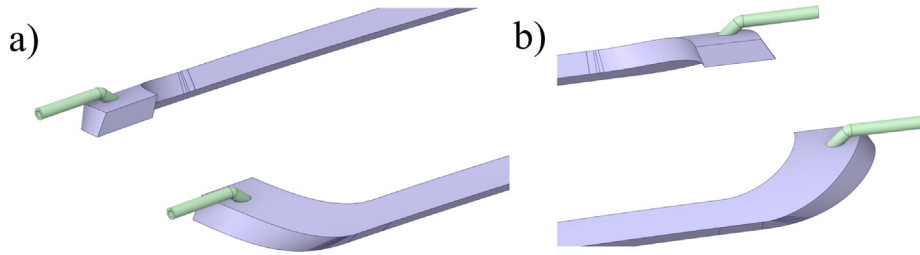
Cryogenic inlet and outlet tubes welded to the wedge ends.
